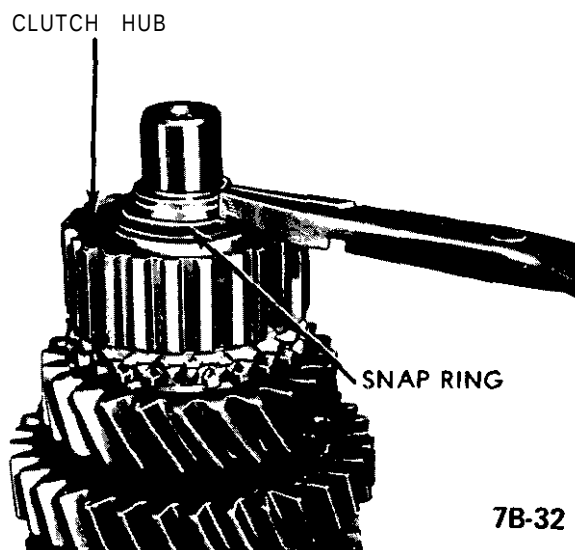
B-32 Removing Snap Ring In Front of Clutch Hub
